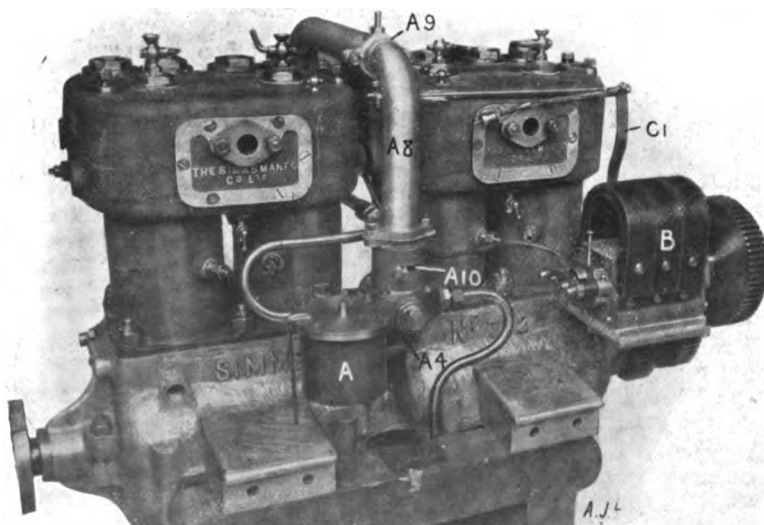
View, from the side, of the 20-24-h.p. Simms Engine, showing the carburettor, A , and the low-tension magneto, B .
